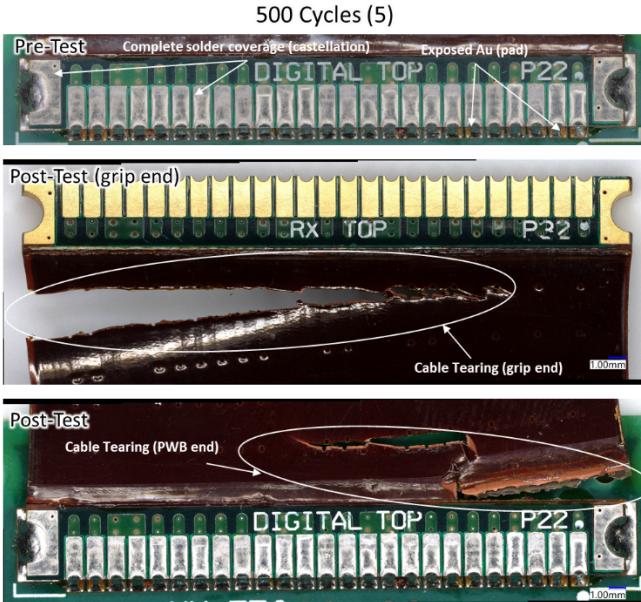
Top views of a flex cable connected to the PCB with castellated via solder joints, before (top) and after (middle, bottom) shear testing. This unit was tested after 500 cycles. Sample ID is shown in parenthesis.
